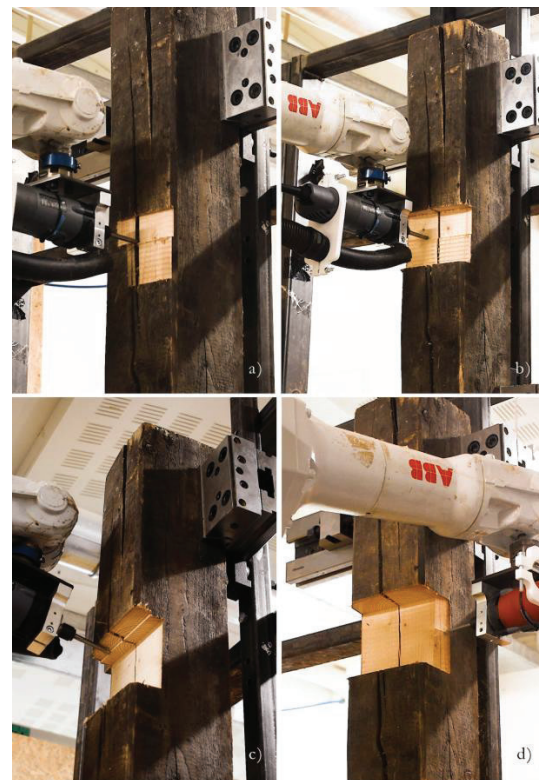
Fabrication of robotic applicable joints. a) Planing flat surface. b) Pocketing joint. c) Insertion angle on the joint side. d) Insertion angle on the timber side.
